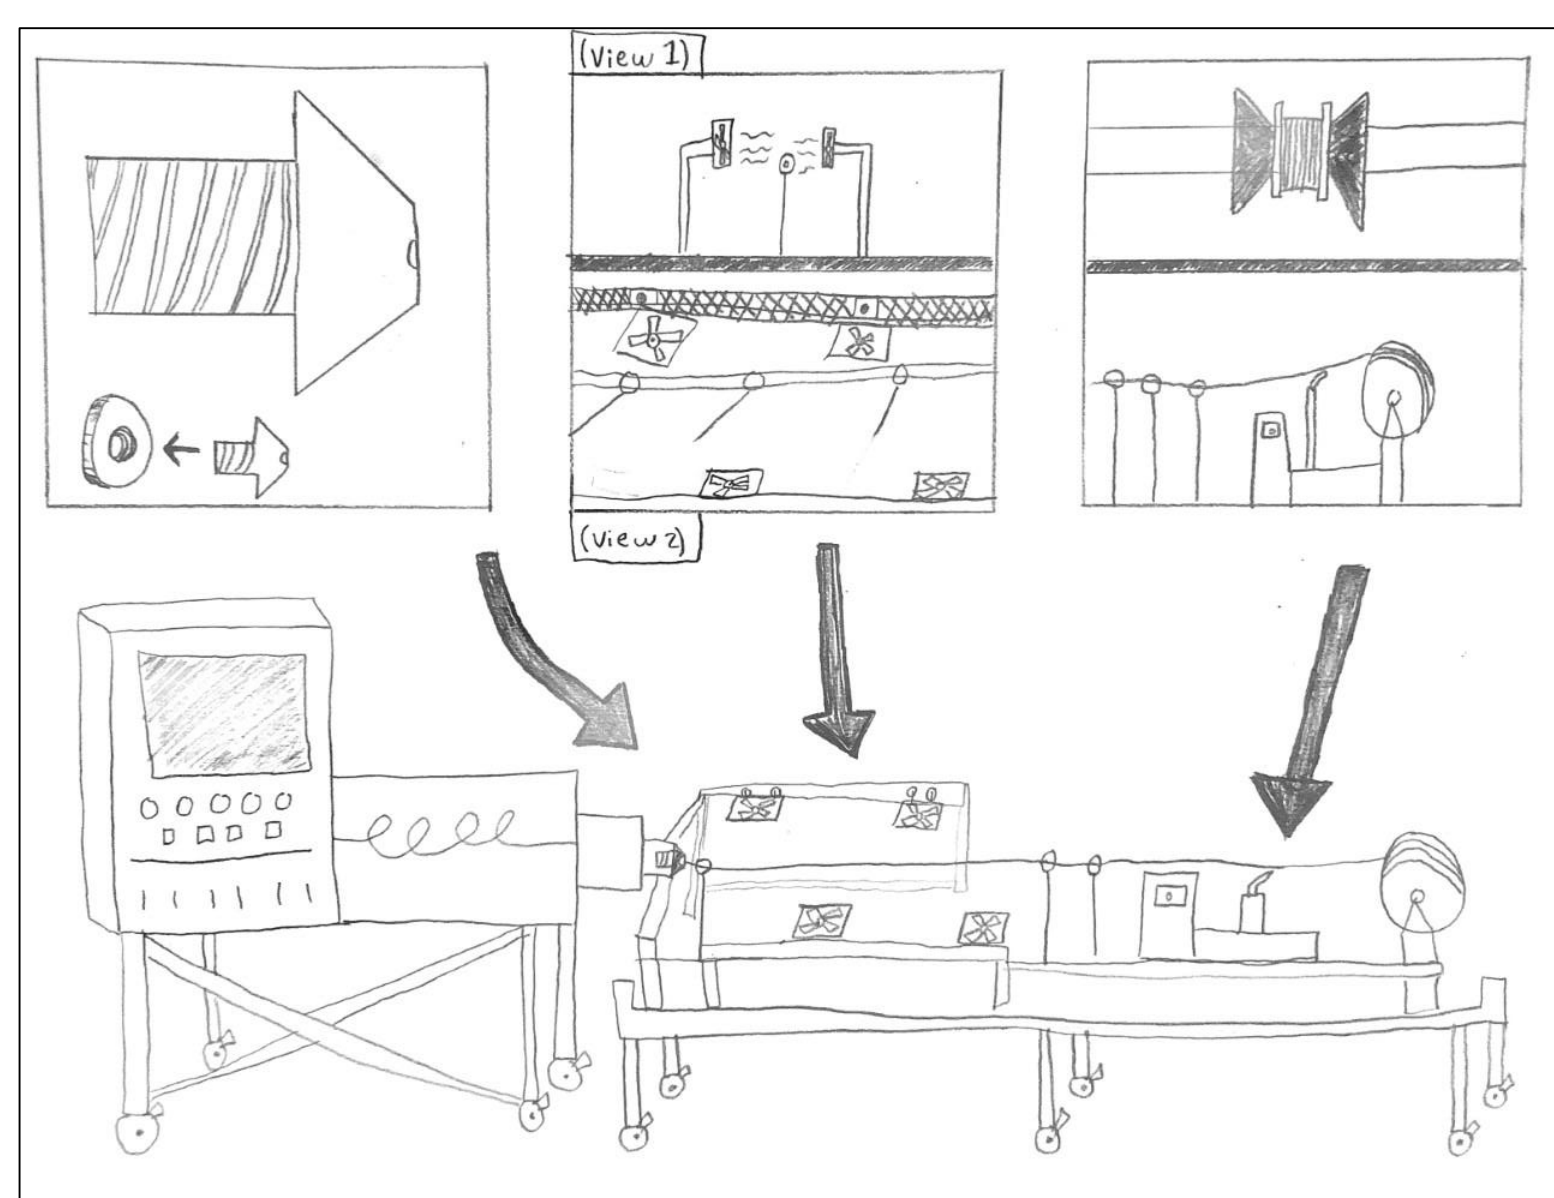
Final Design Concept III - Nozzle Die, Side Mount Fans, Tick Winder
